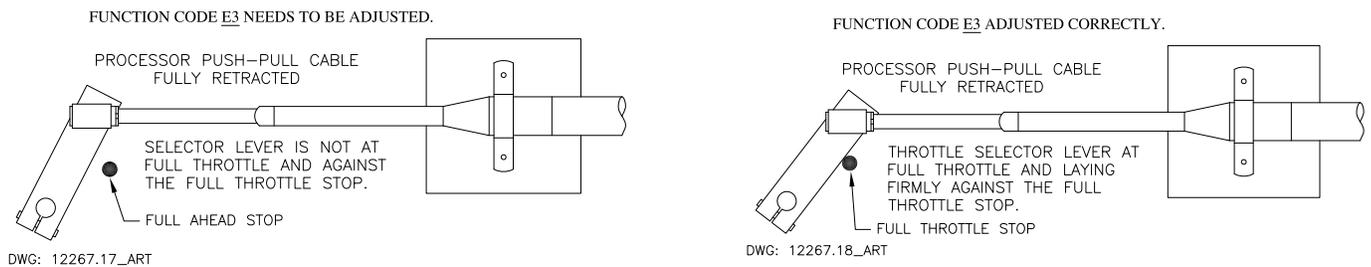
Throttle Push-Pull Cable Full Throttle Position
